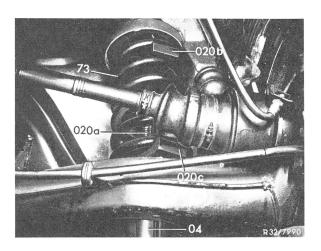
O4 Special wrench for spring tensioner73 Rear spring
